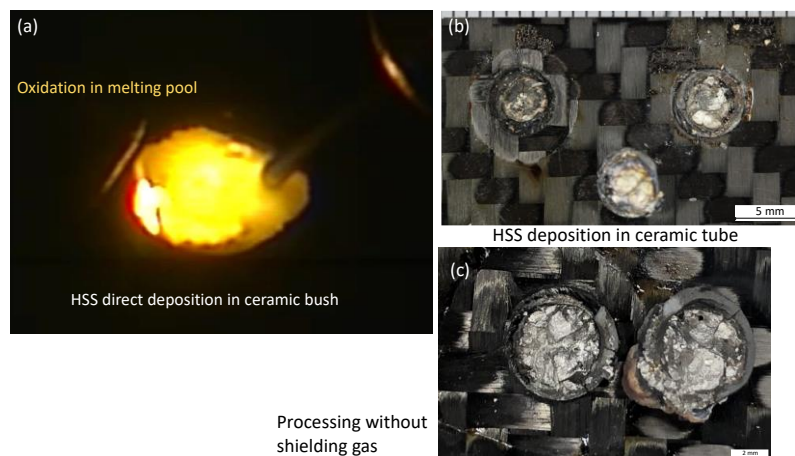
HS-LR joining with ceramic bush: (a) experimental processing record, (b) top views of fracture surfaces and (c) comparison experimental without shielding gas.
